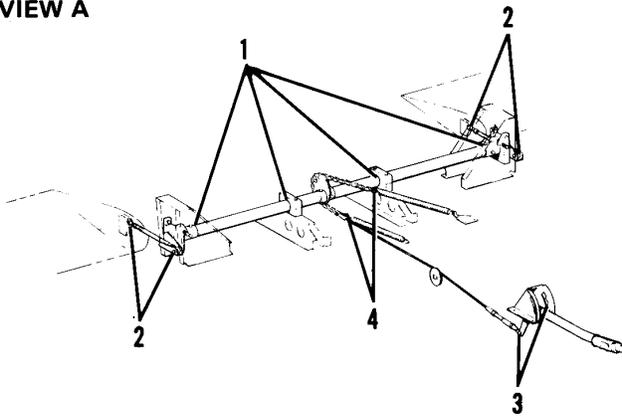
Lubrication Chart (Landing Gear, Main)
